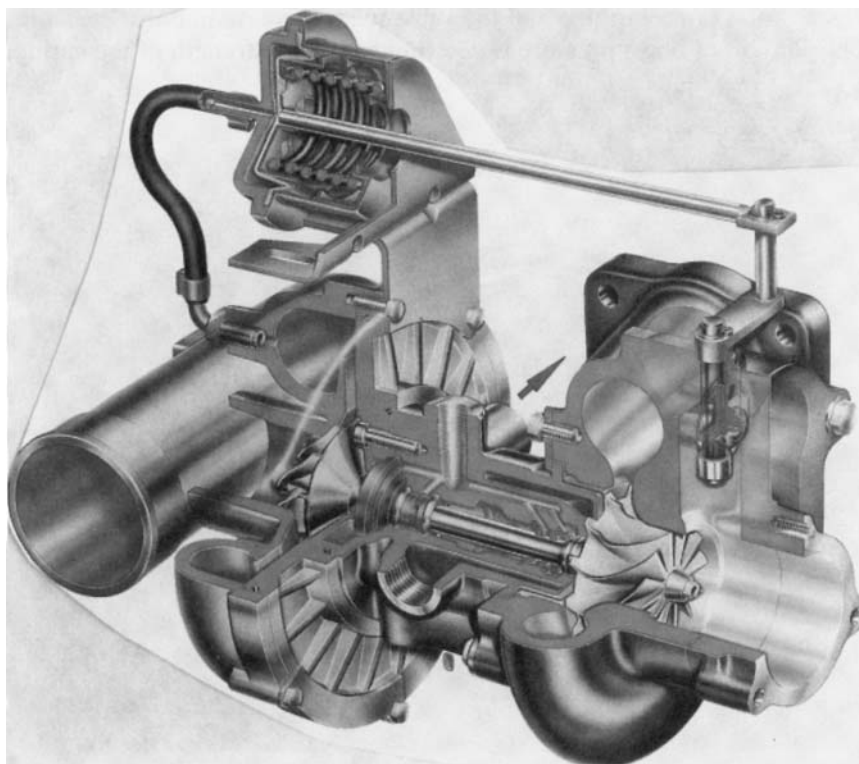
Turbocharger fitted with swinging arm-type valve. Boost pressure sensed in the discharge outlet from the compressor is transmitted via the tubing to the diaphragm side of the control valve. When boost pressure exceeds the spring force, the shaft opens the swing valve so a portion of the exhaust gas bypasses the turbine.
